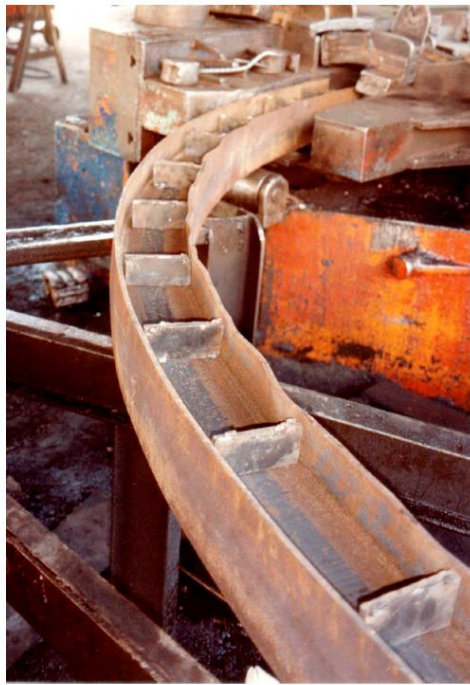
Buckling of an H section steel set being bent to a small radius. Temporary stiffeners have been tack welded into the section to minimise buckling but a considerable amount of work is required to straighten the flanges after these stiffeners have been removed.
